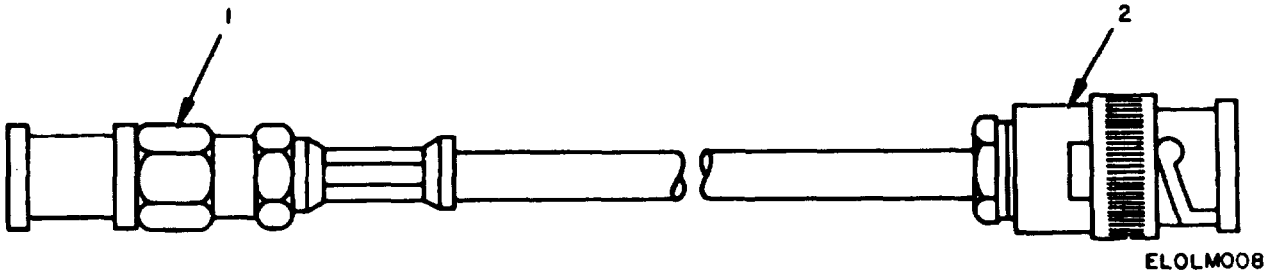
Cable Assembly, Special Purpose CX-10573/U (W4).
